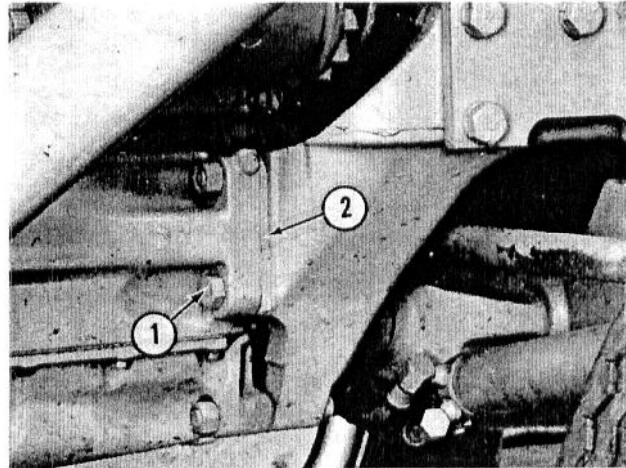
ENGINE AND FRONT AXLE SUPPORT ATTACHING POINT (Gasoline Models)
